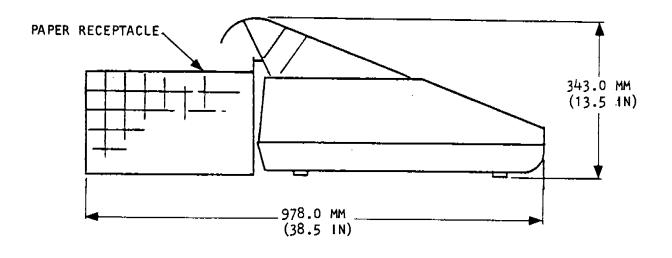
Printer with Optional Paper Receptacle, Outline Dimensions
